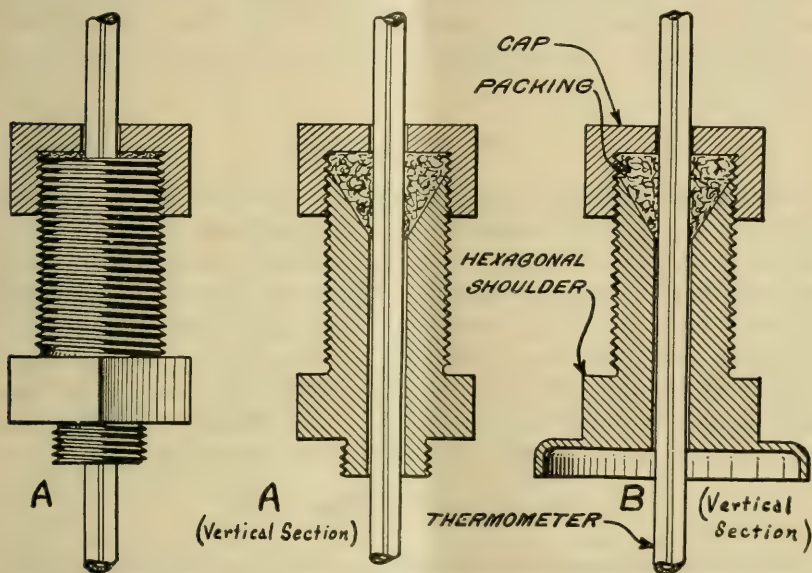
Details of the special fitting to which the can is attached for the test: *A*, The original form; *B*, a modification of *A*, differing from it in that the fitting may be soldered directly to an ordinary hole-and-cap can.
